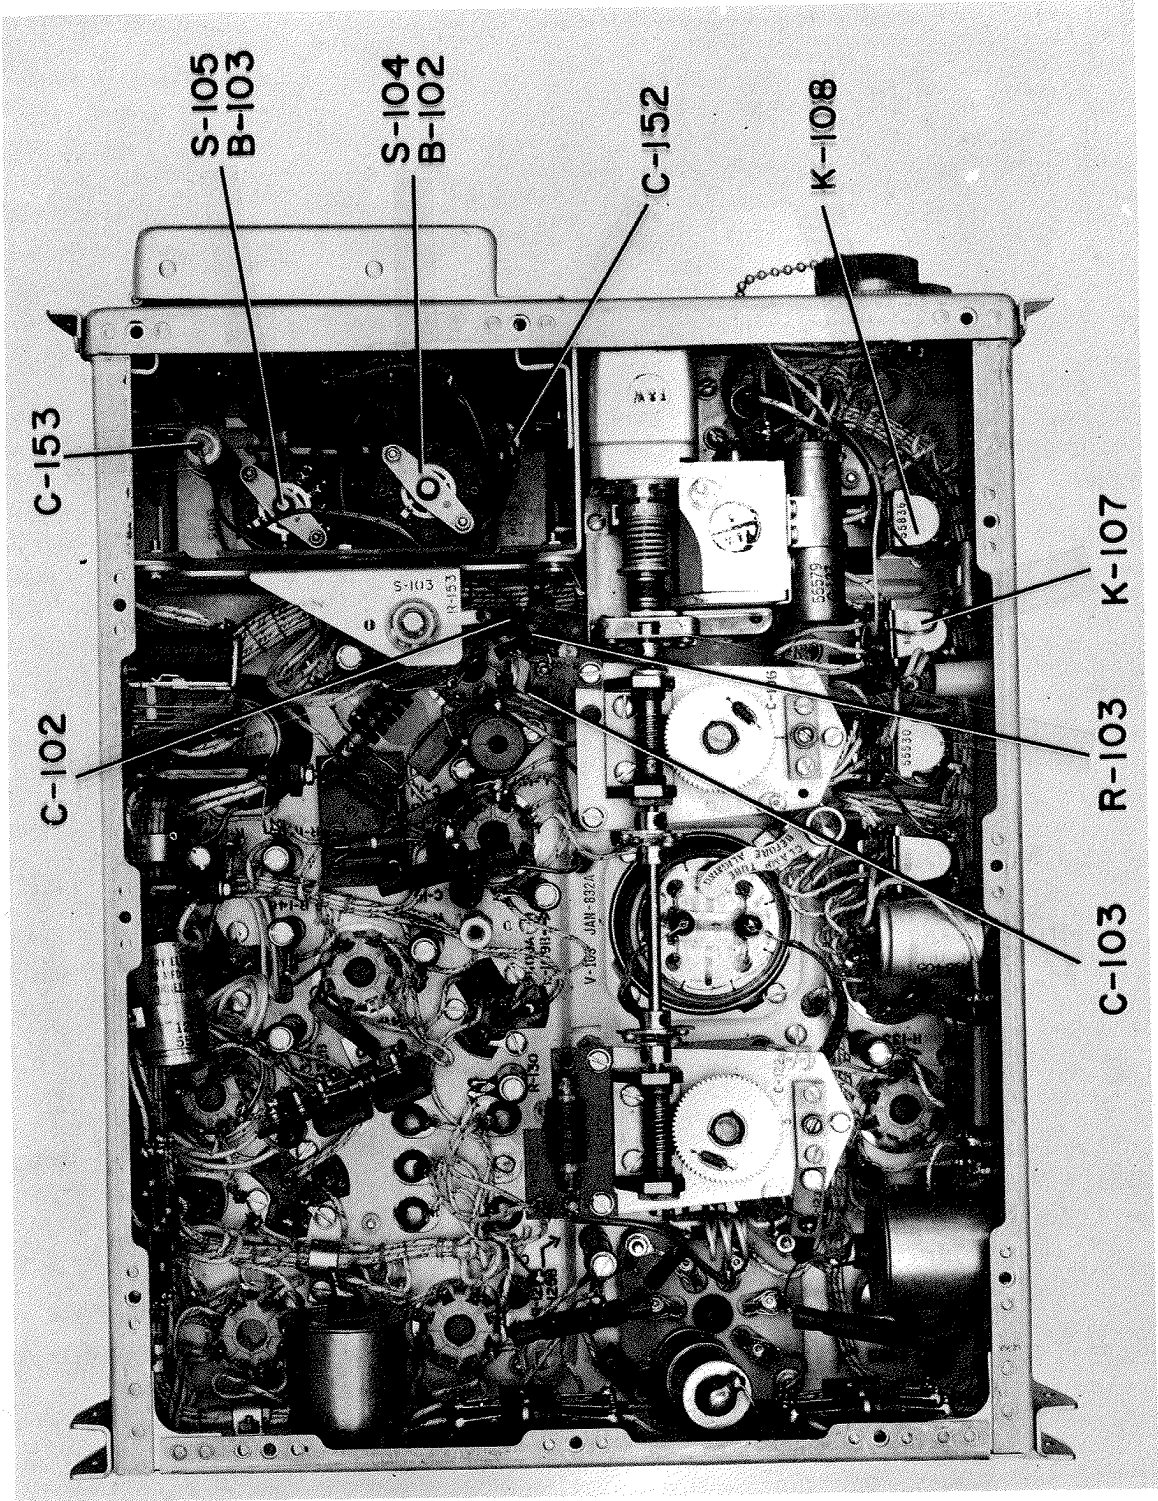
Radio Transmitter T-452/ARC-49—Bottom View, Cover Removed
